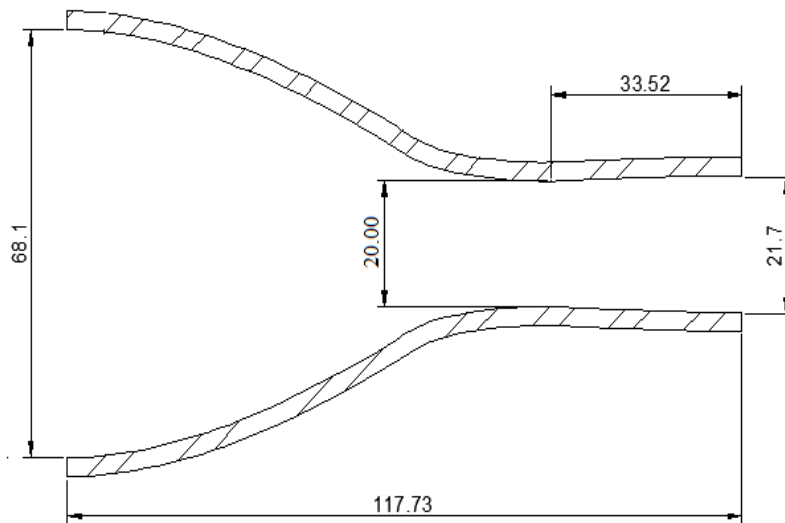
(d) Machine drawing of *PM/4* double parabolic nozzle
